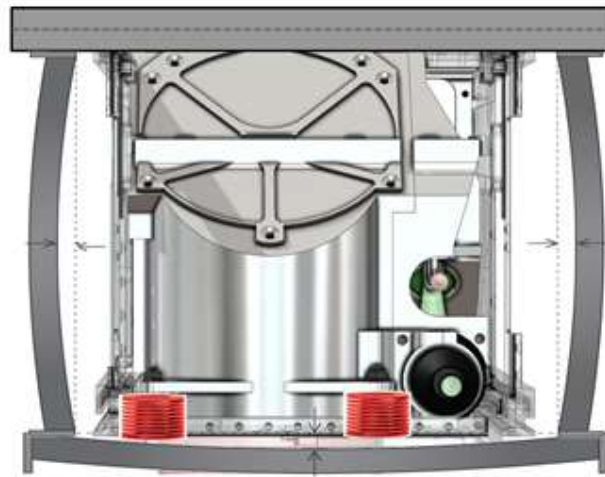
Exaggerated defects of the bottom plate, side plates, and shock absorbers.
